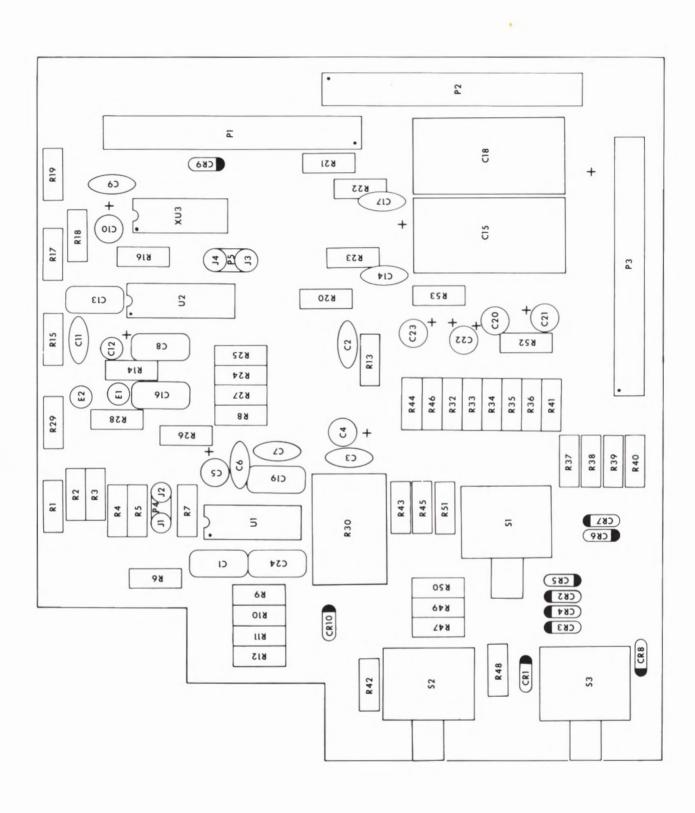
(SHEET 2 OF 2) EXPANSION CARD F.M.A.P. COMPONENT LOCATION - 843 2200 001
